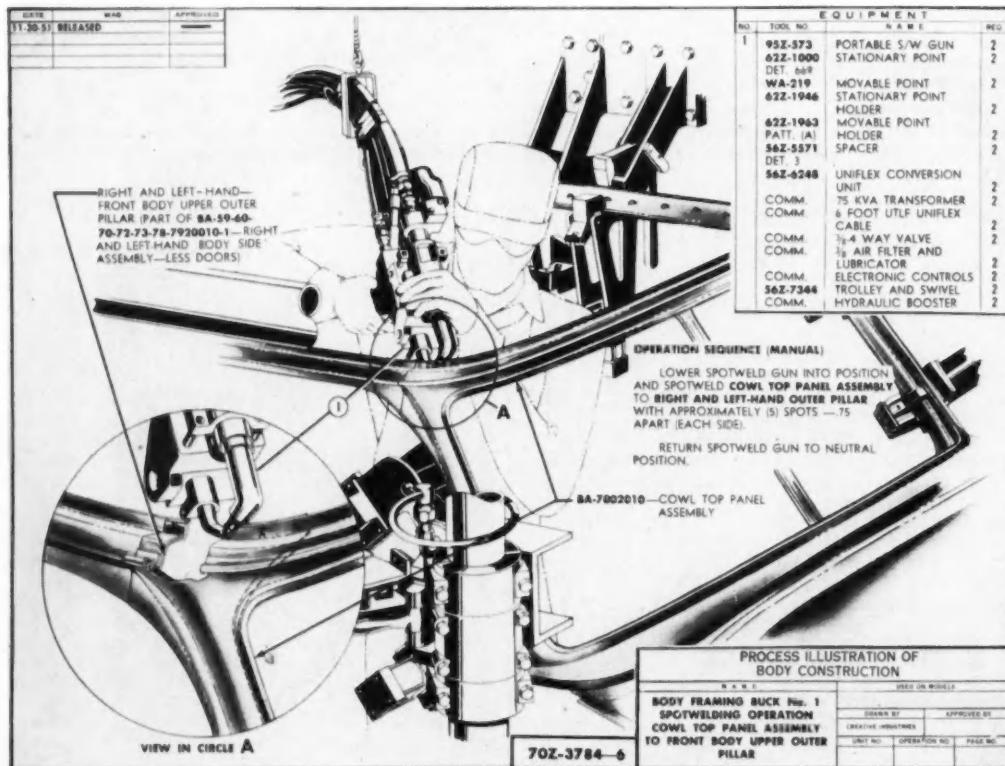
One of operation sequences of automobile body assembly shown in perspective
